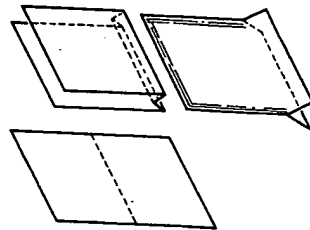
Three-weld pouch with a gusset at the base.
